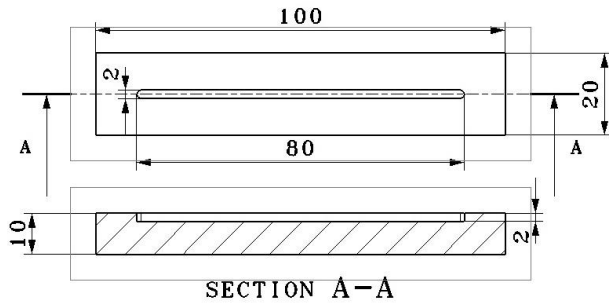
A schematic drawing of the FSP specimens (dimensions in mm).
